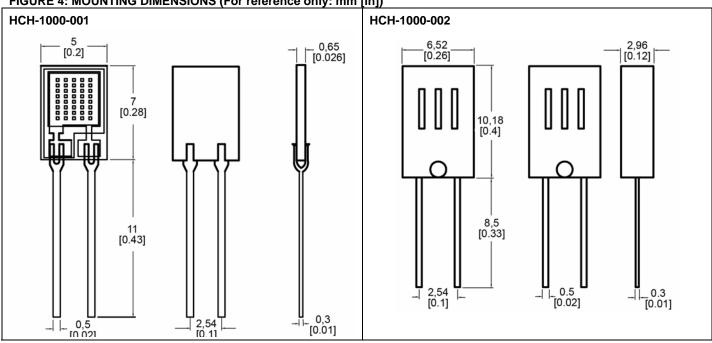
MOUNTING DIMENSIONS (For reference only: mm [in])
